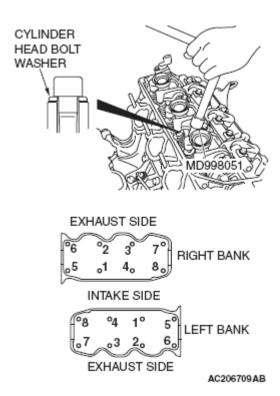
Tightening Cylinder Head Bolts Using Special Tool Courtesy of MITSUBISHI MOTOR SALES OF AMERICA.
